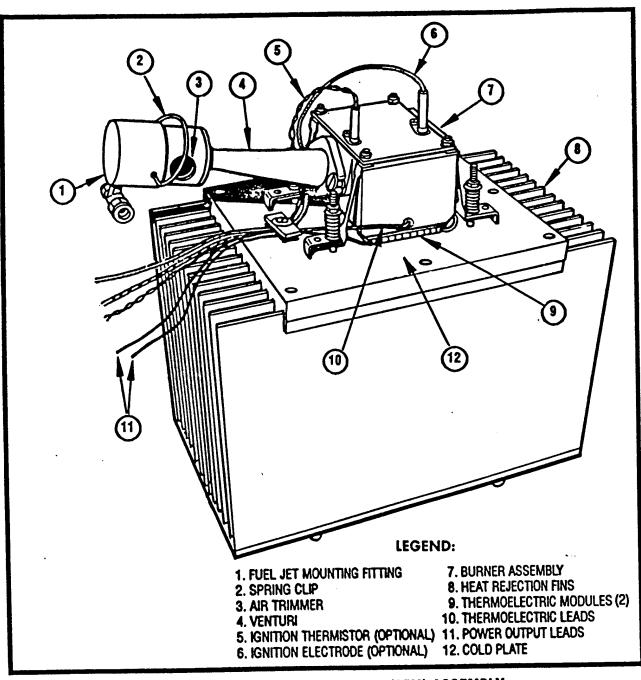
BURNER/FIN/MODULE (BFM) ASSEMBLY
